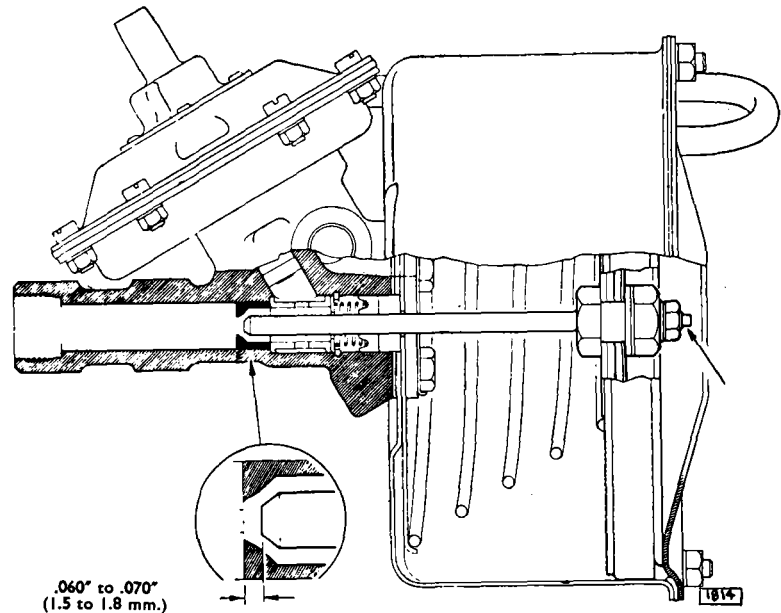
When assembled there must be .060" to .070" (1.5 to 1.8 mm.) clearance between the end of the push rod and the piston. The clearance is adjusted by means of a screwdriver at the point indicated by the arrow.
